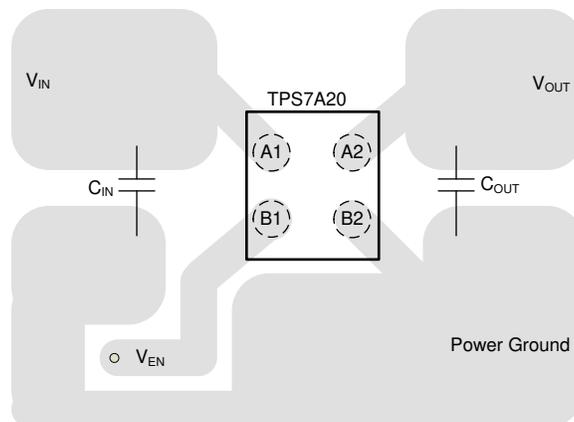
YCJ and YCK Package (DSBGA) Typical Layout
